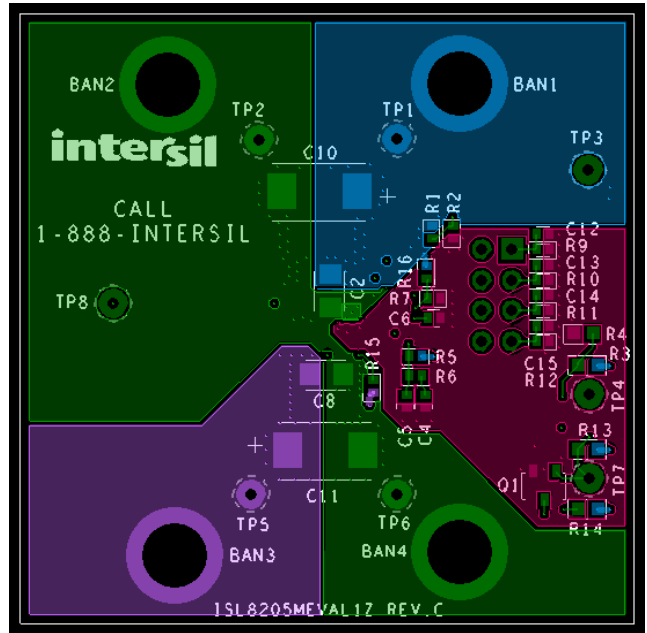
BOTTOM LAYER (BOTTOM VIEW)
